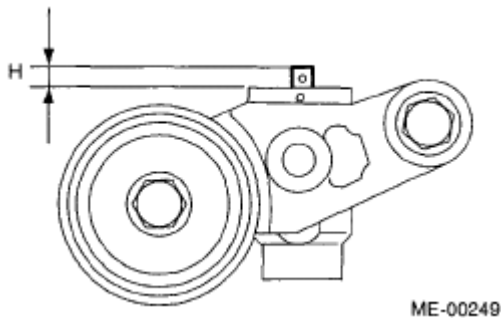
Identifying Amount Of Rod Protrusion "H" From End Surface Of Body
